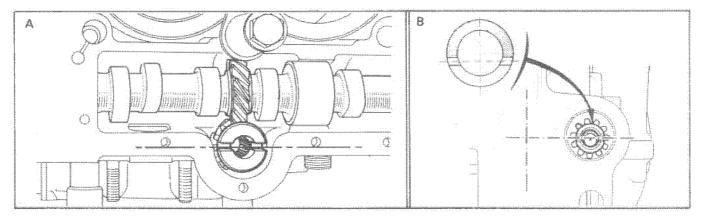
Correct position of distributor drive slot (No 1 piston at TDC) 807/841/843 engines (A) & 847 engines (B)
